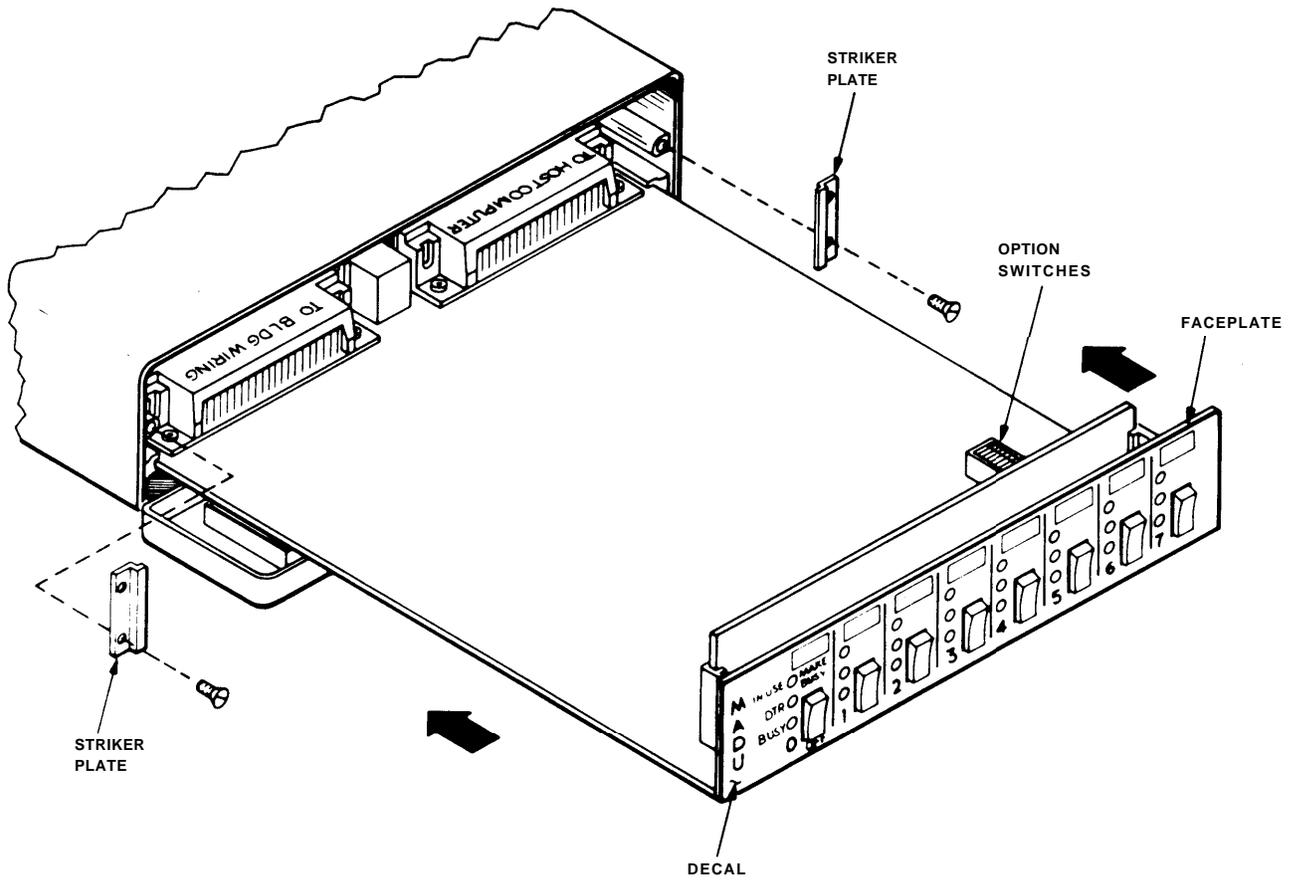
MADU Stand-Alone Mounting Assembly (Front View)
